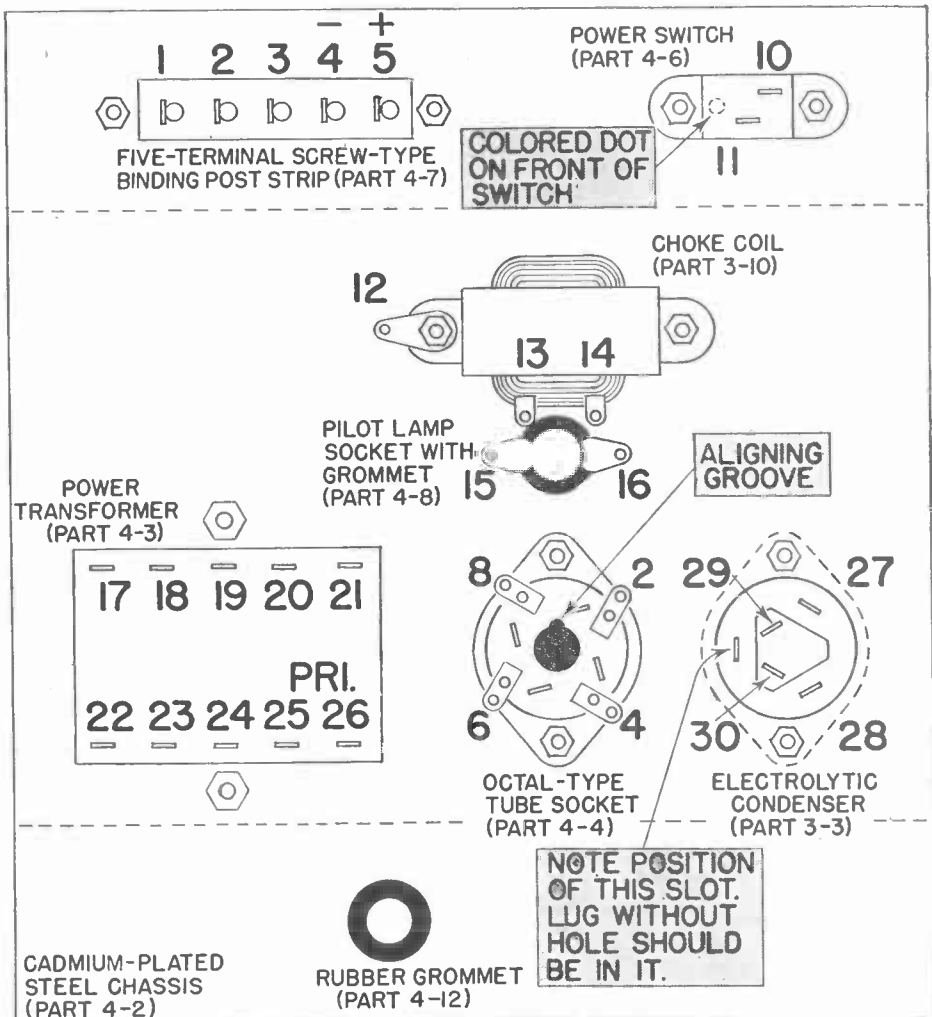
Bottom view of chassis with sides spread out, showing exact positions of all parts which are mounted directly on the chassis, and showing positions of all numbers which you are to place on the chassis and on the parts with metal-marking crayon. The dotted lines indicate the positions of the bends in the chassis.
